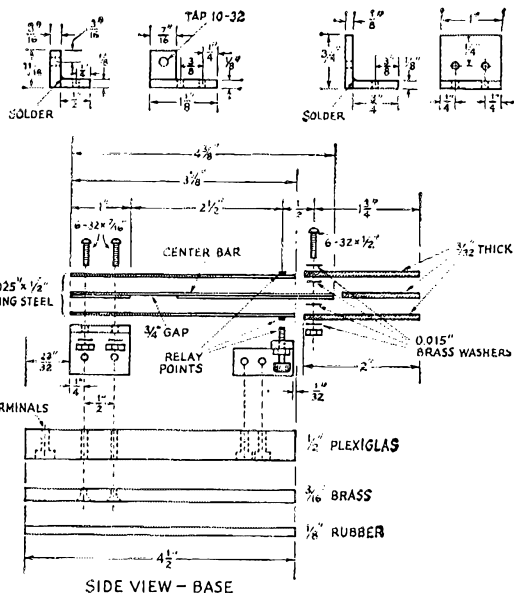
Sketch showing construction of the electronic-key lever. The base is $2\frac{3}{4}$ inches wide.
